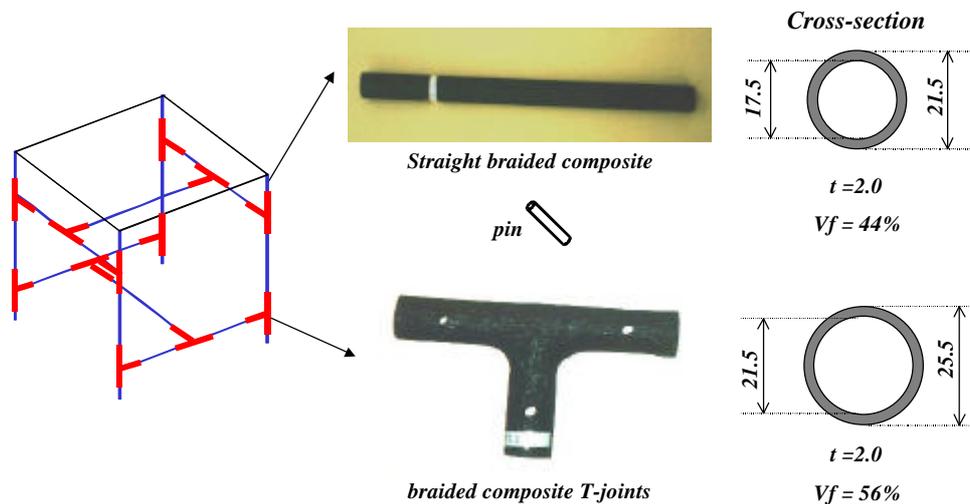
Photographs and cross-sections of CFRP braided straight tube and T-shaped tube fabricated
